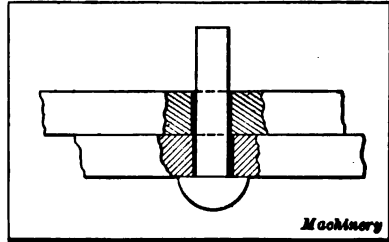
Extreme Case of Difference in Size between Hole in Sheet and Diameter of Rivet — Electric Riveting effectively closes this Clearance Space
